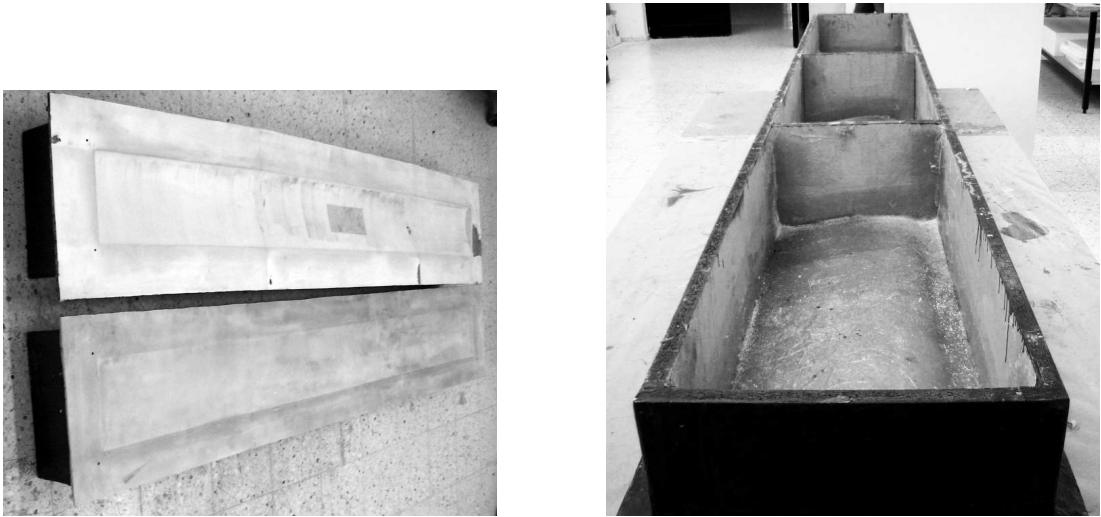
Upper and lower wing skin female molds, and the back-up structure.
